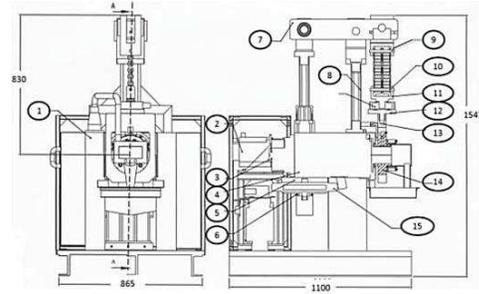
An assembly diagram of journal bearing test rig. 1) Frame, 2) Motor, 3) Motor bracket, 4) Spindle assembly, 5) Bellow top plate, 6) Bellow guide plate, 7) Loading Lever, 8) Pivot assembly, 9) Chain, 10) Chain holder, 11) Load Cell holder, 12) Load Cell, 13) Loading plate, 14) Bearing unit and 15) Pneumatic bellows.
